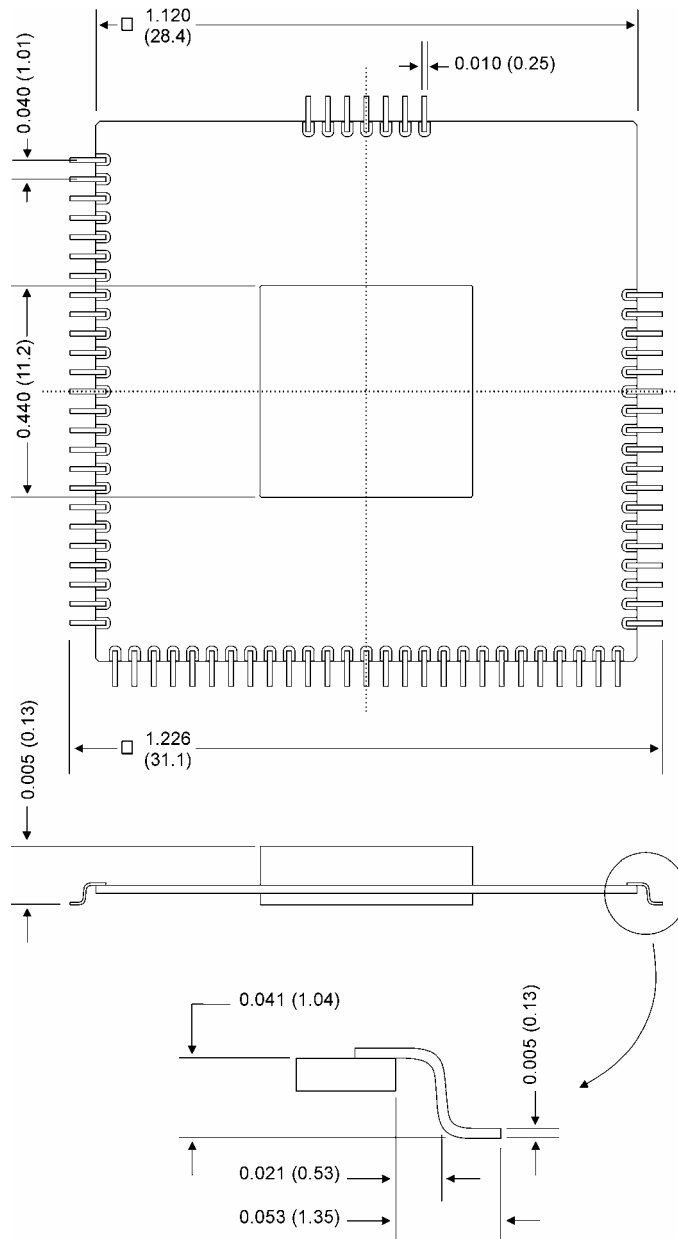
RDA012M4MS-HD package, dimensions shown in inches (mm).
